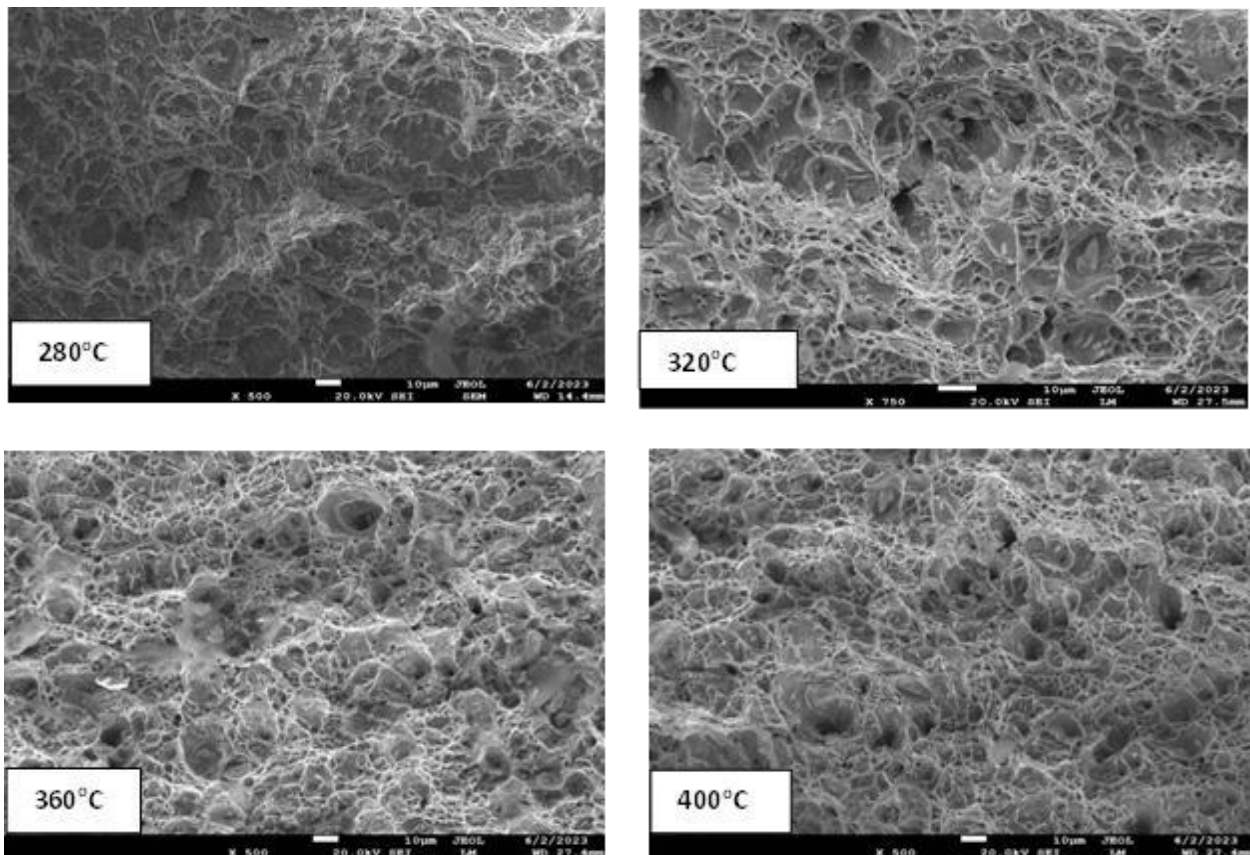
Fractographs of the fractured tensile samples at the austenitizing temperature of 900°C with austempering temperatures indicated
